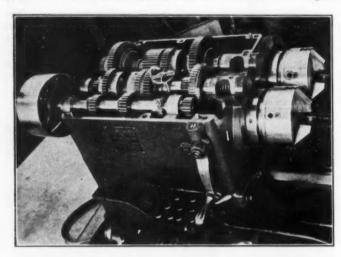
Headstock of Double-Spindle Flat-Turret Lathe
